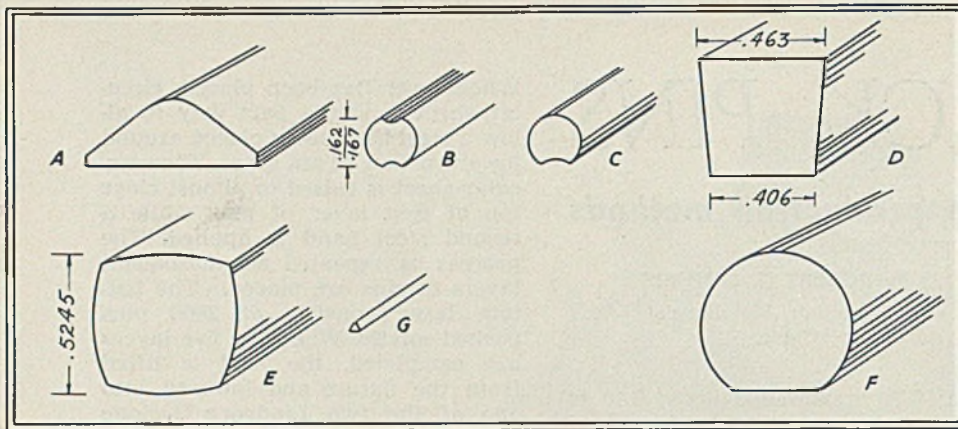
Some of the special shapes of steel parts that are being produced by carbide die drawing process
